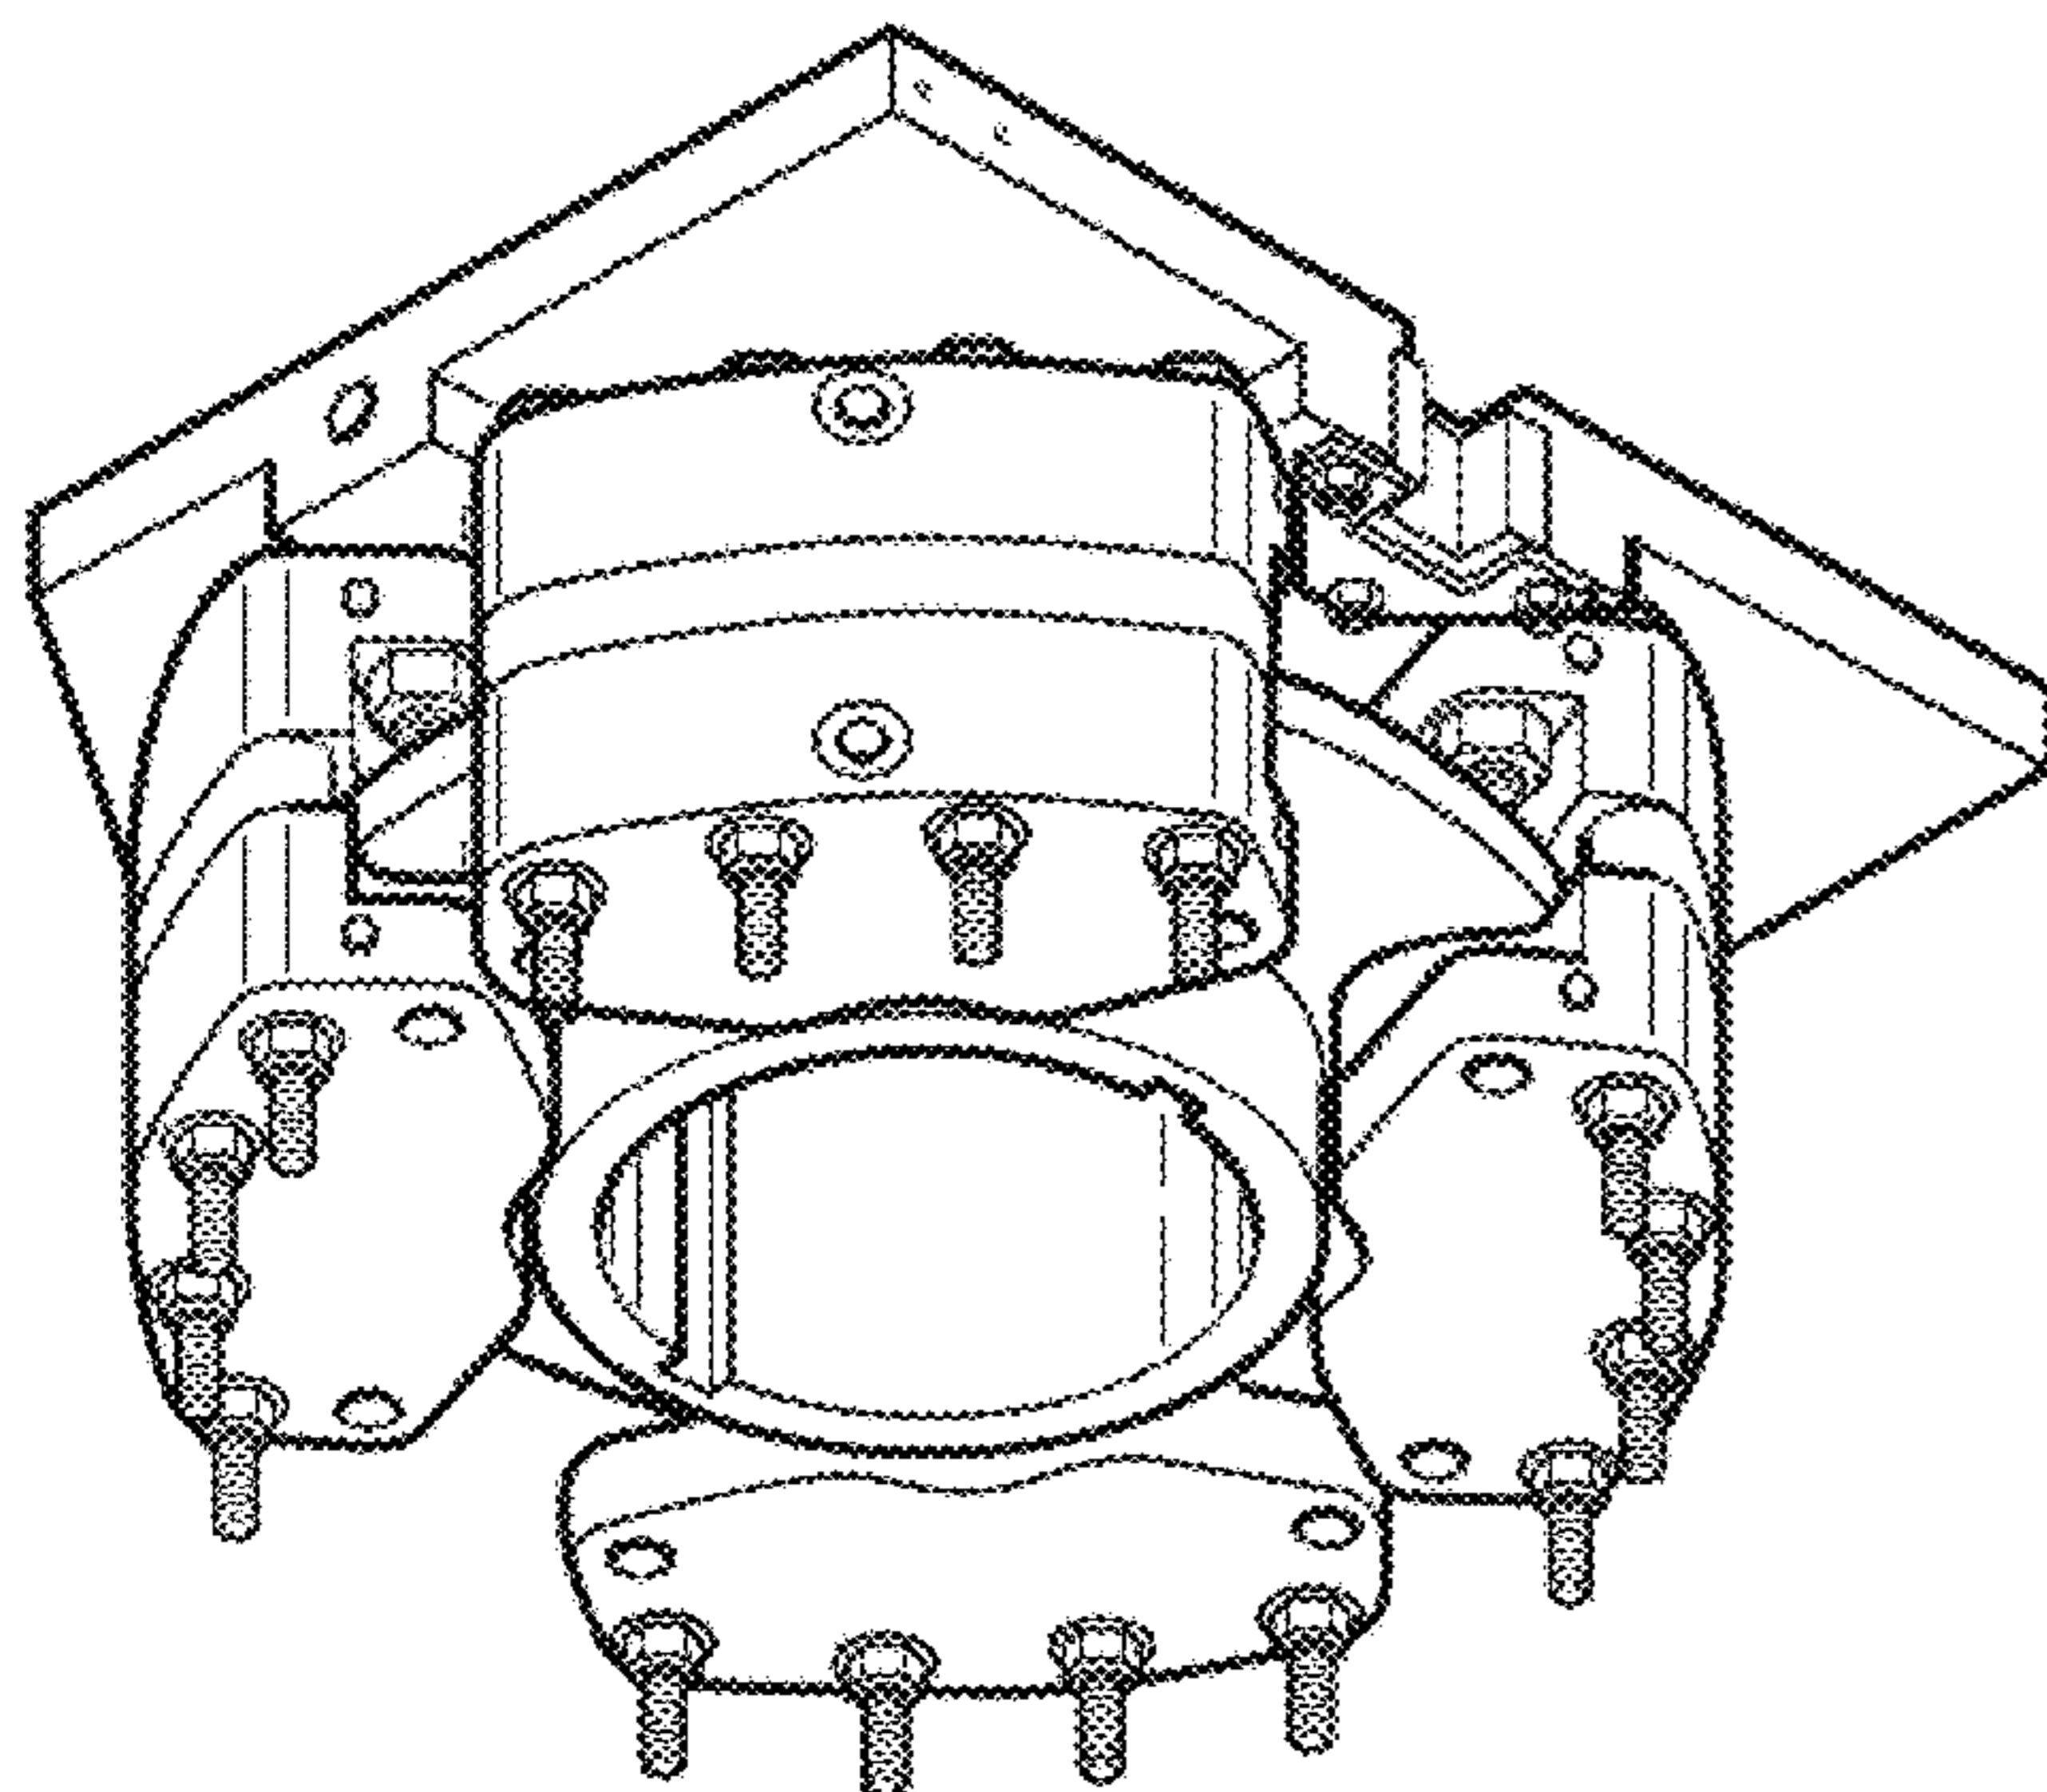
is a bottom, front, and right-side view of a disc brake assembly showing the new design.
